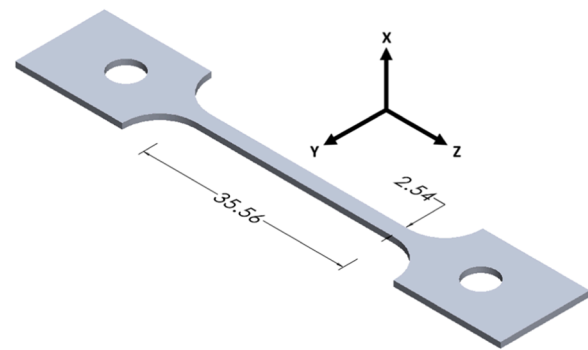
Isometric view of a creep specimen. All dimensions are in mm.
